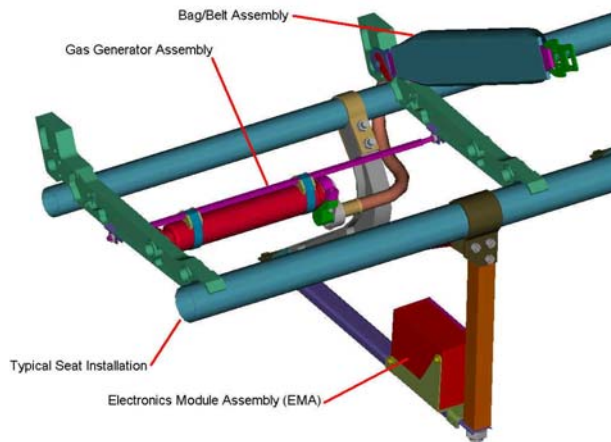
Typical AAIR Component Installation Shown on Seat Structure
